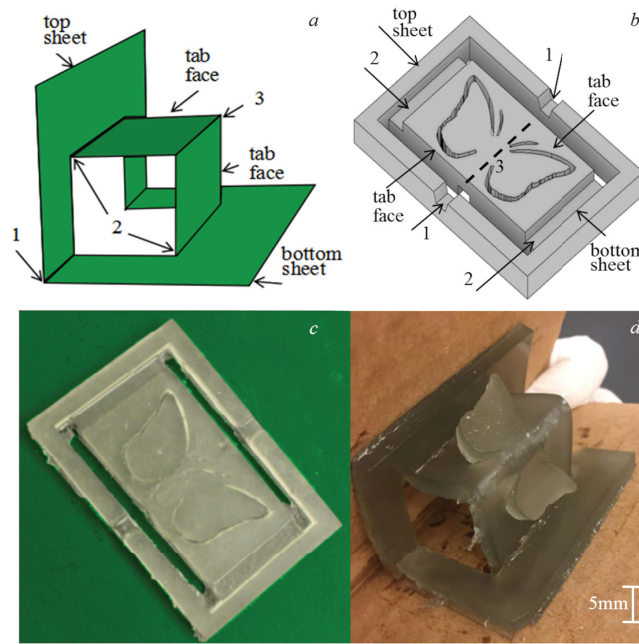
Pop-up. a) The mechanism of pop-up using parallel folds. b) The CAD model of a pop-up design with a butterfly profile. c) The printed 2D sheet. d) A folder is used to fold the sheet and make the butterfly being popped out.
